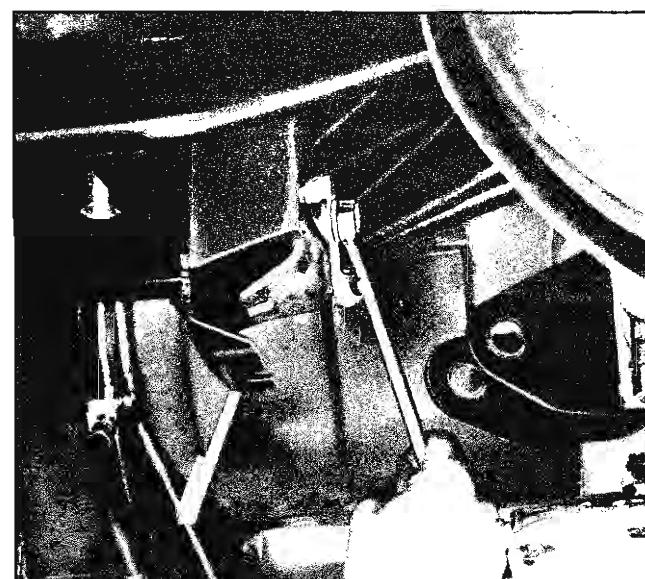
Removing Support Crossmember to Rear Crossmember Bolts
